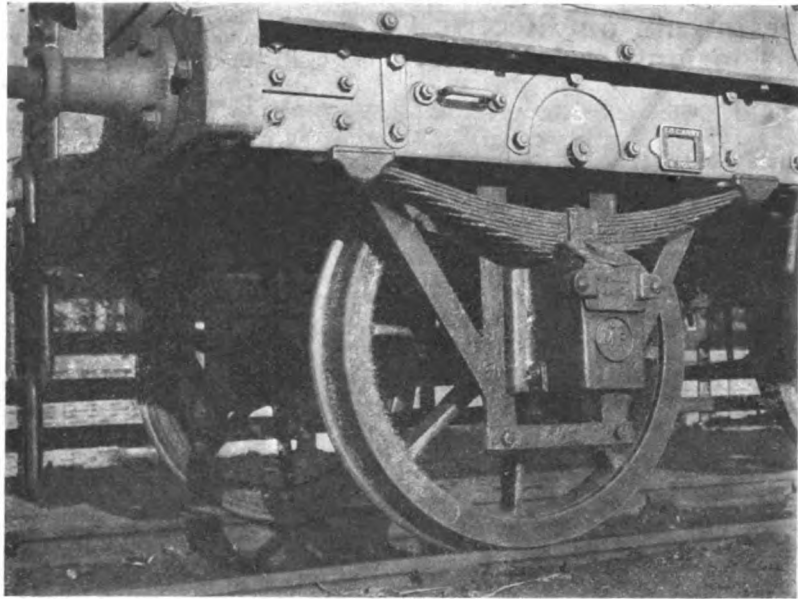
DETAIL VIEW OF M.R. GOODS TRUCK, SHOWING WASHER PLATES USED ON OUTSIDE OF SOLE BARS FOR AXLE-GUARD BOLTS.
